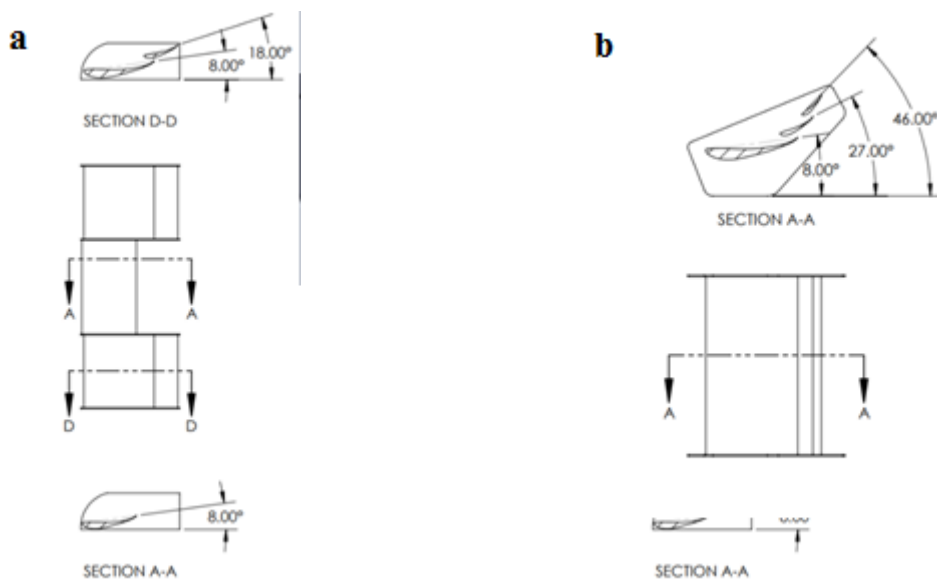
a). Front wing Angle of Attack and b). Rear wing Angle of attack
